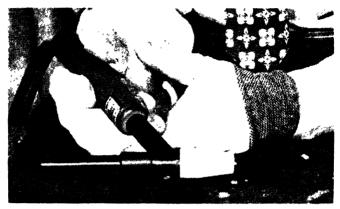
Holding the inert gas are welding torch before starting the arc.
